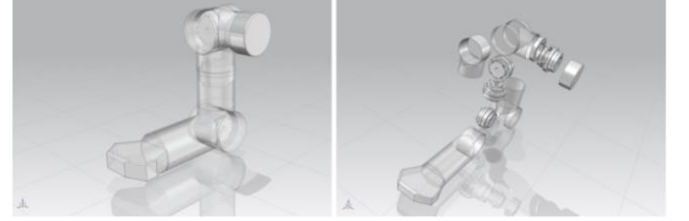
Assemblies and exploded diagrams of one robot arm.
